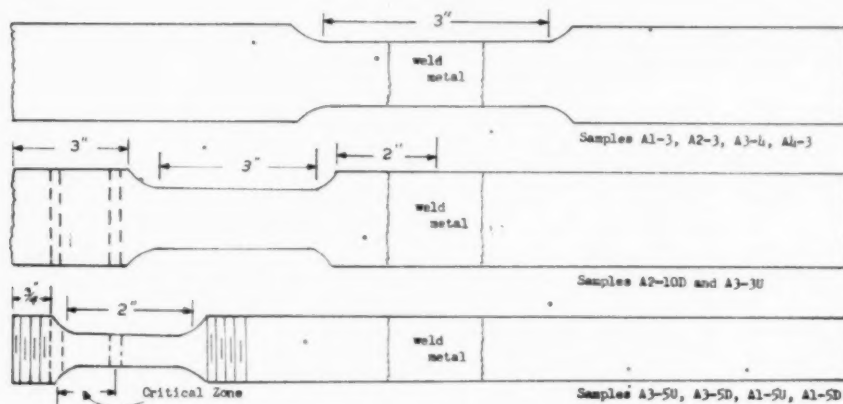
(b) LOCATION OF GAGE SECTION OF TENSILE SPECIMENS OF PIPE SECTION
